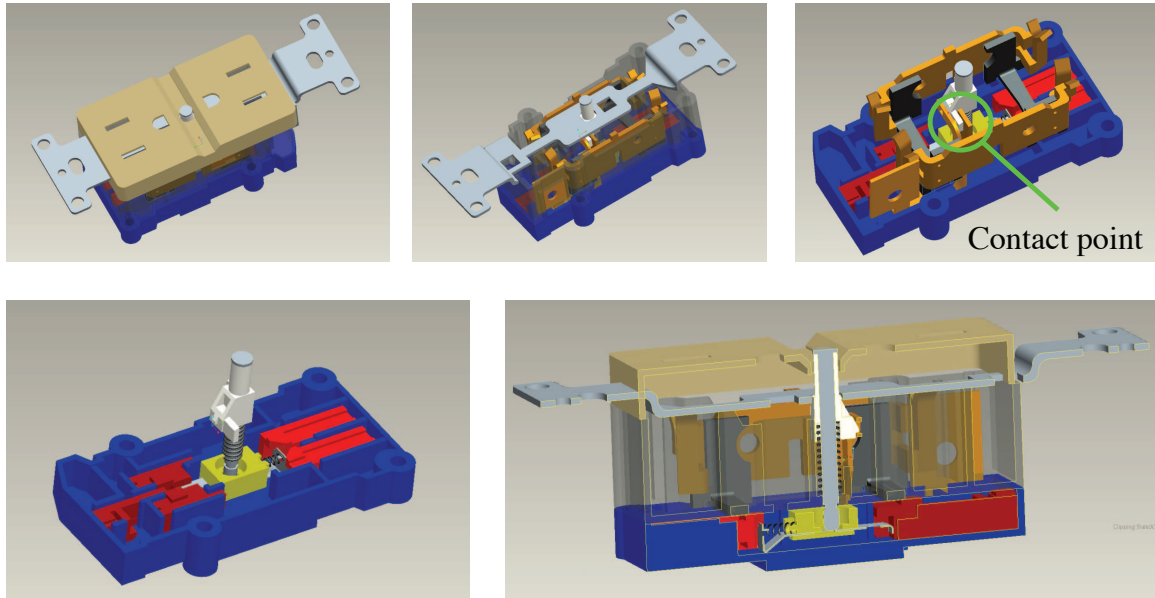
Exploded views of BSafe receptacle with the contact point of this cut-off mechanism
